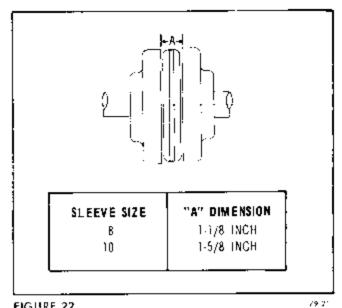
Compressor to Motor Coupling Alignment (Elastomeric Type Coupling)
